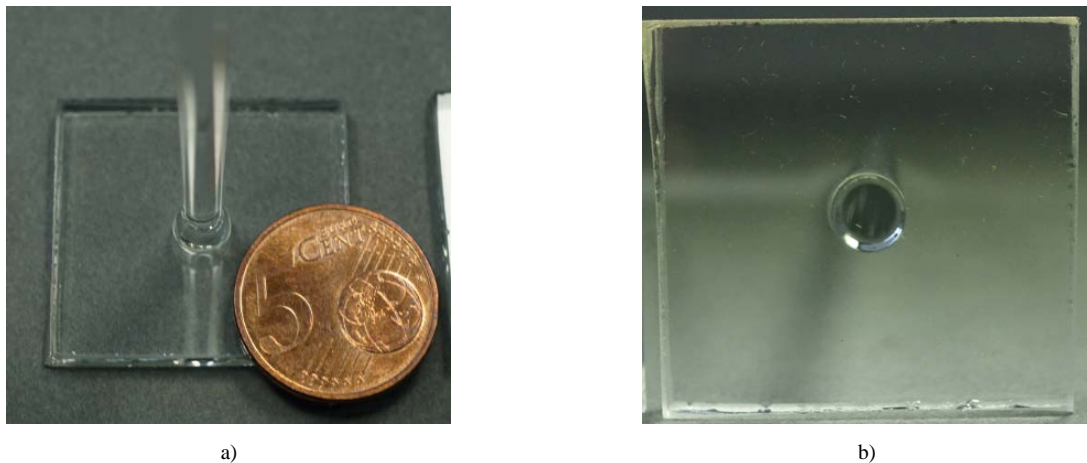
Point shaped specimens after manufacturing (borosilicate glass, rod diameter 3 mm, thickness glass plate 3.4 mm): a) perspective view, b) bottom view.
